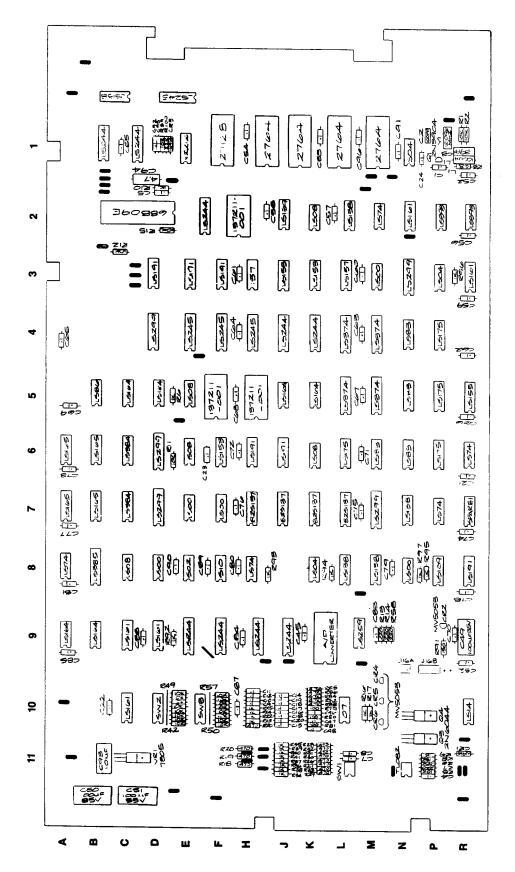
Main Printed-Circuit Board Assembly A038461-21 G
